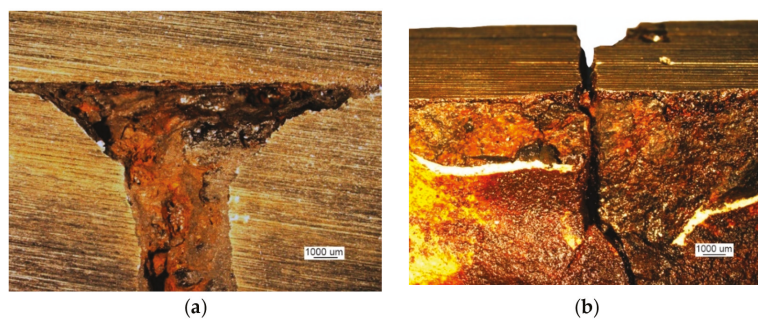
Stereoscopic optical microscopy views (handy-size bulk carrier 30185 DWT): (a) crack reaches part 2 and (b) crack transition from part 1 (upper part of the figure) to the joint.
